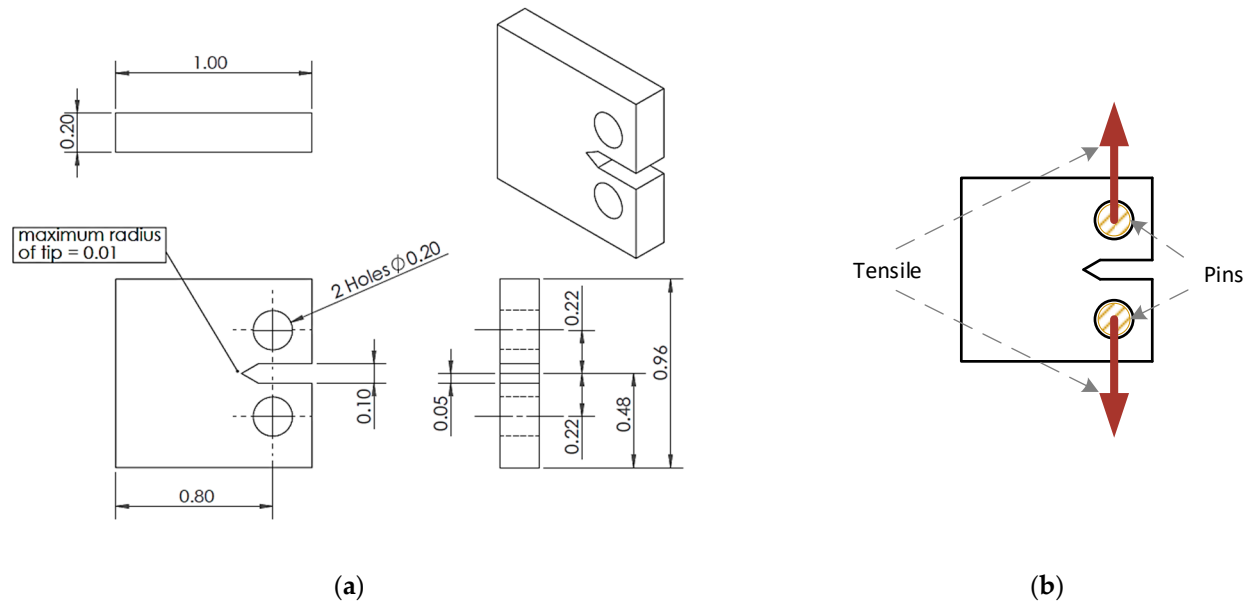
Tested specimen: (a) design (unit: in); (b) applying tensile.
